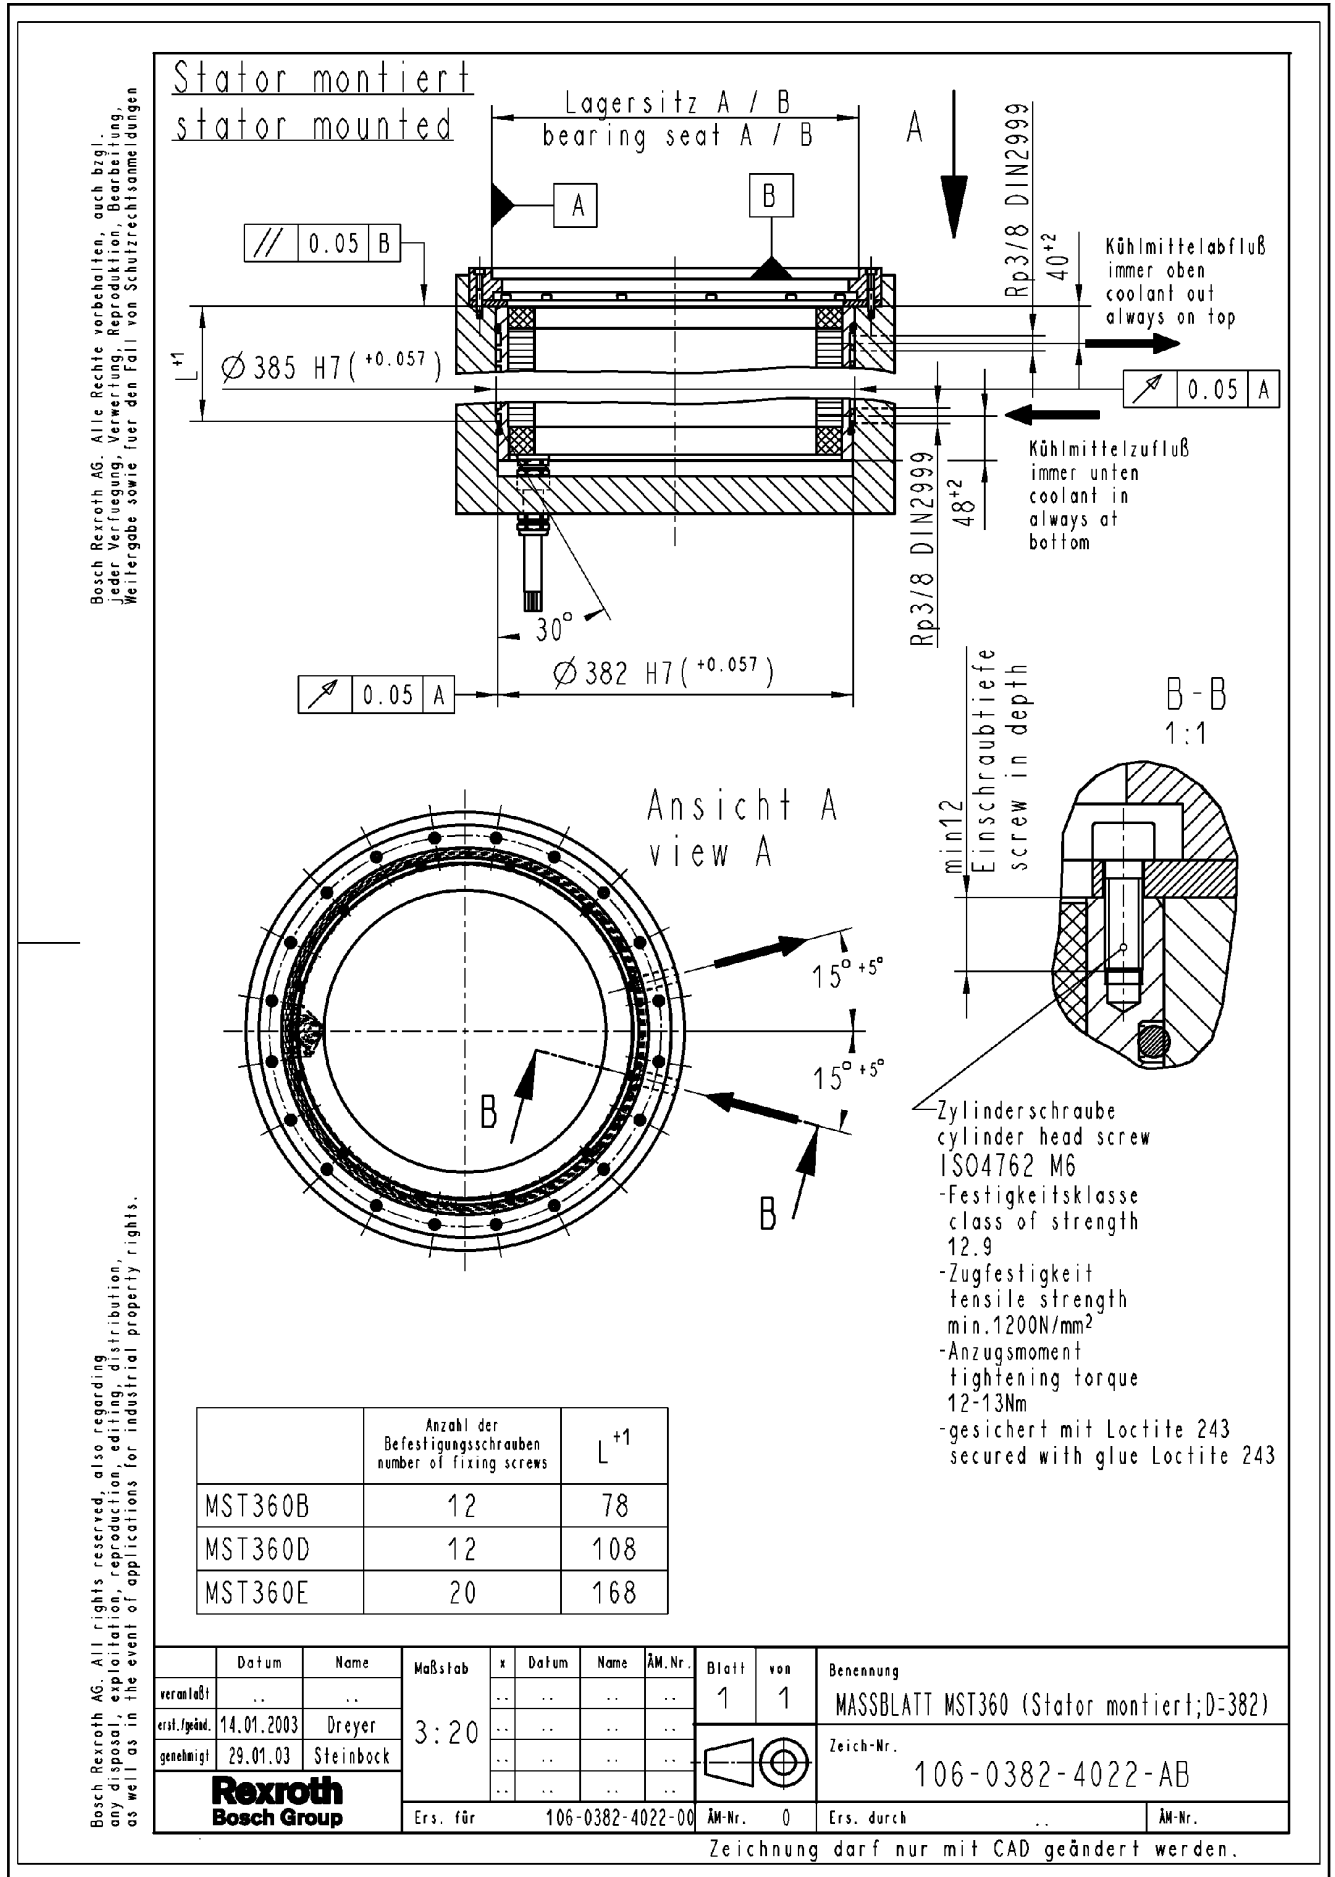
Dimension sheet MST360 mounted, electrical connection "SN"
